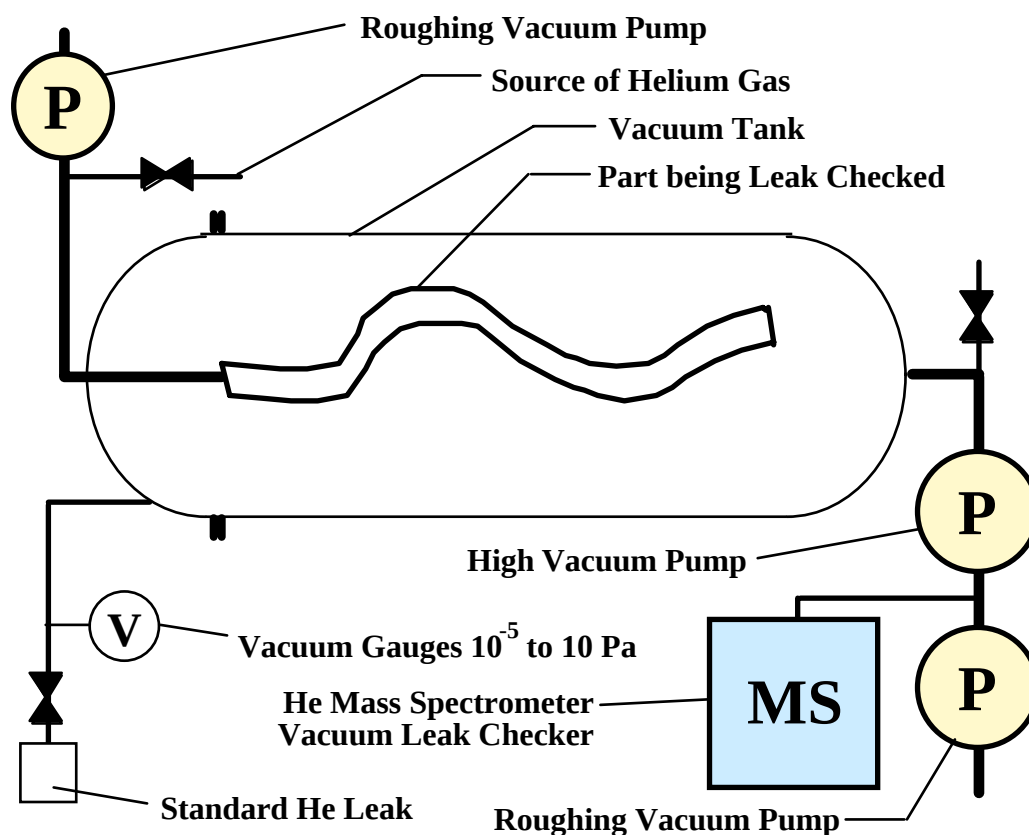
A schematic representation of the vacuum leak check procedure when the part being checked is inside a vacuum vessel
